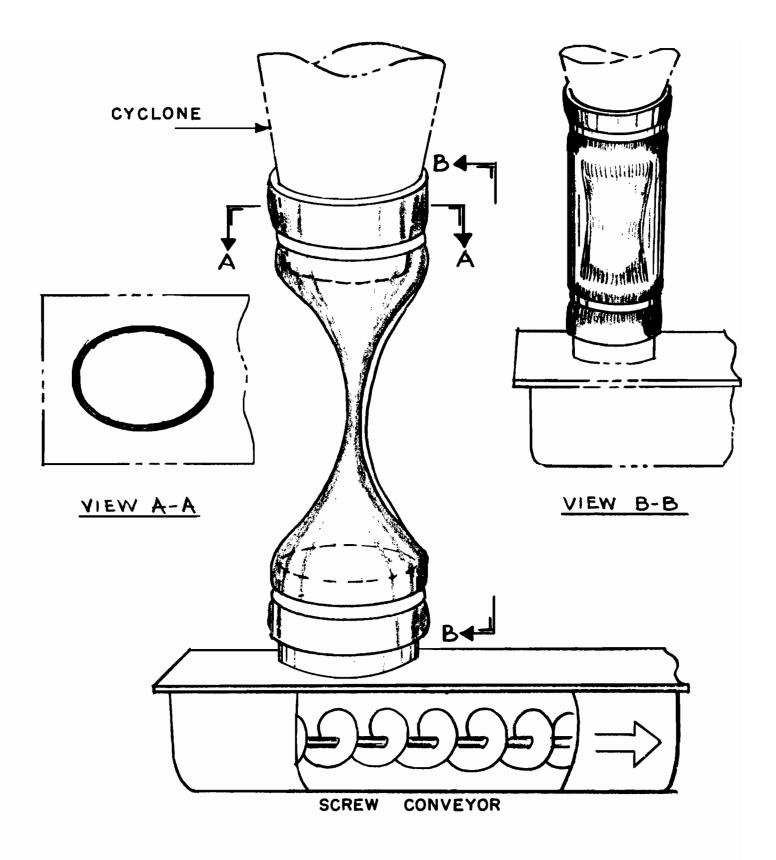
DUST-TIGHT CYCLONE-CLOSURE-MOLDED RUBBER SEAL
